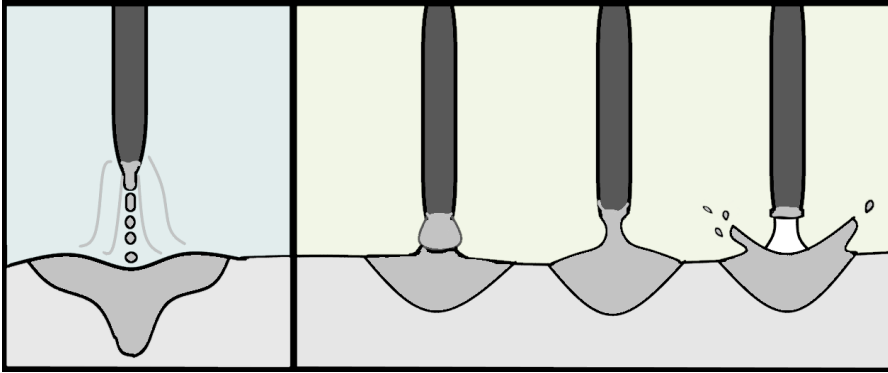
Transfer of filler material: There are two main arc classifications when using a consumable electrode. Spray arc welding is shown to the left, and the steps of short (-circuiting) arc welding are shown to the right. Adapted from [23, p. 11].
